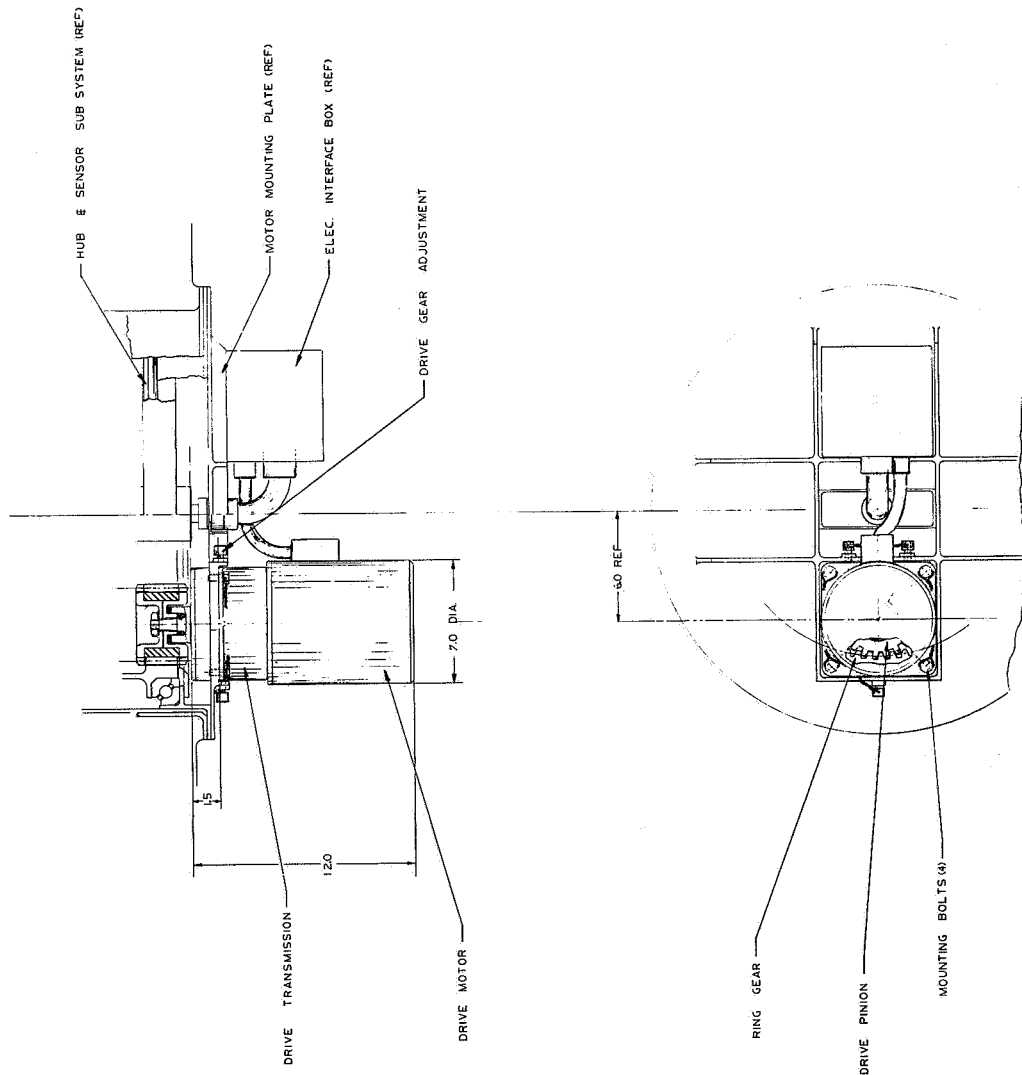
Pivot Segment - Space Research Centrifuge.
